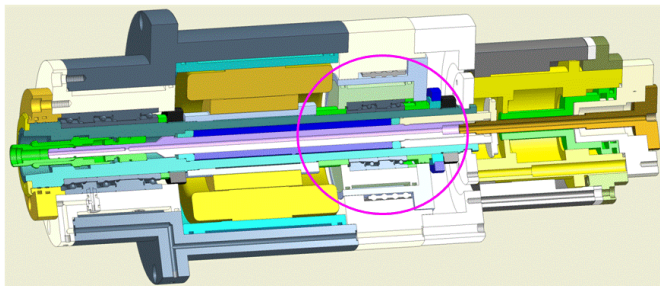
Ball Bush Type Preload Units of Main Spindle's Bearing
